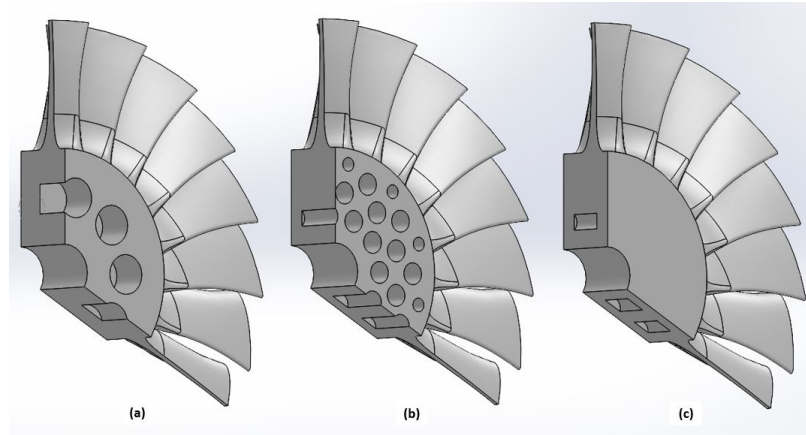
Three cross sections designed for the SLCM printed turbine: alumina infill design 1(a), zirconia infill design 2(b), Capped design 3(c).
